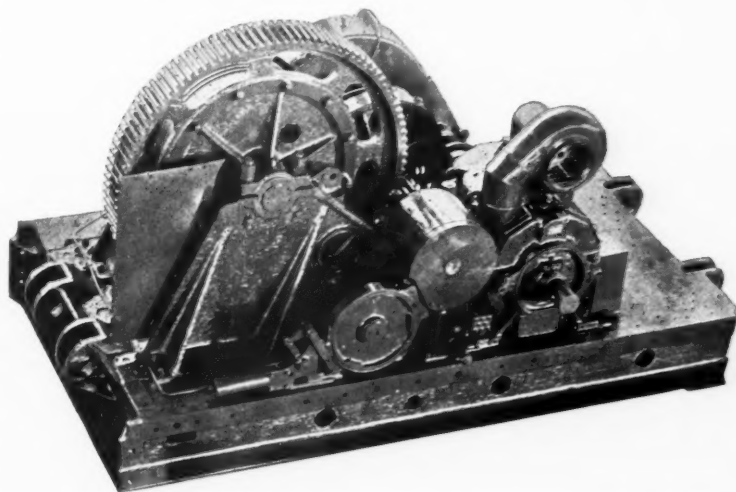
Hoist Machinery assembly on a Bucyrus 170-B shovel.
